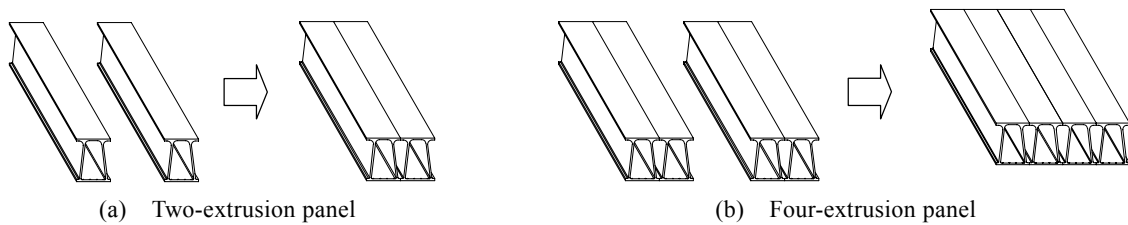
Fabrication of aluminum decks by friction stir welding
